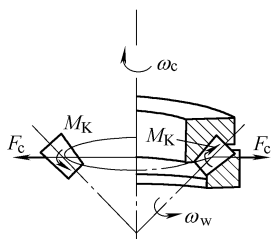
Inertia moment direction in thrust angular contact roller bearing
